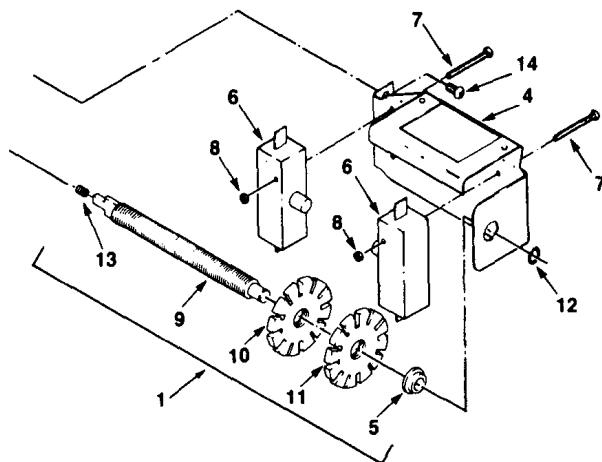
B. Drum Area, Low Headroom Models - 2 Part Double, Cross Mount
